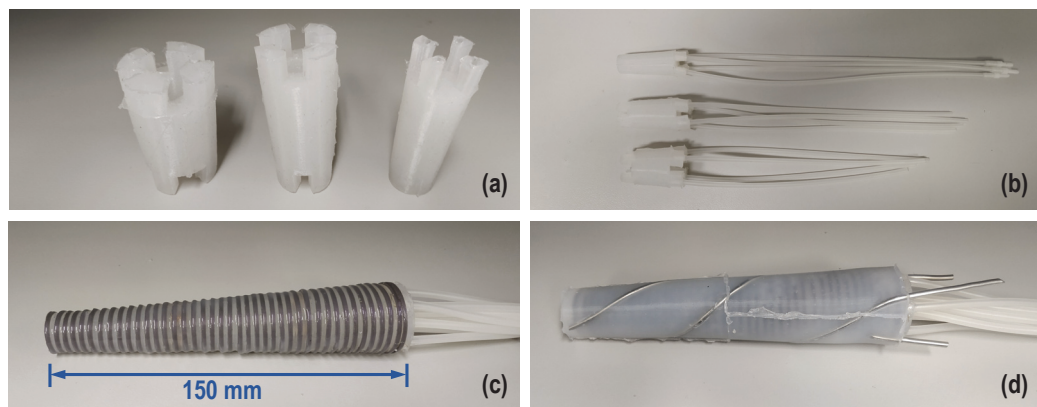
Different stages of the soft multi-segment arm fabrication: (a) the three segment cores, (b) attachment of the tubes to the linear chambers of the three segments, (c) fitting of the inner rings, and (d) casting of the helical chambers (the helix-shaped metal inserts are subsequently removed).
